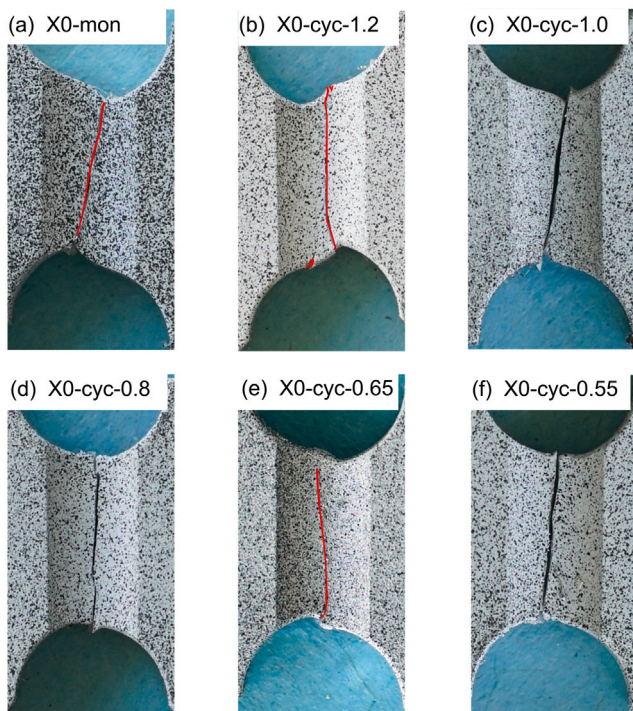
Fracture images and fracture lines are marked in red in (a), (b), and (e).
